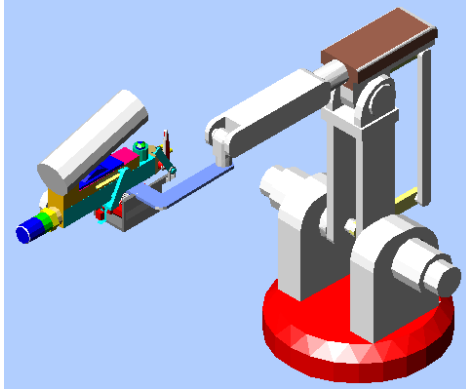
Robot arm with the automated combustion powder thermal spray gun attached.
